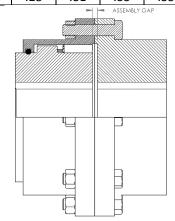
DOUBLE FLEX ASSEMBLY GAP
